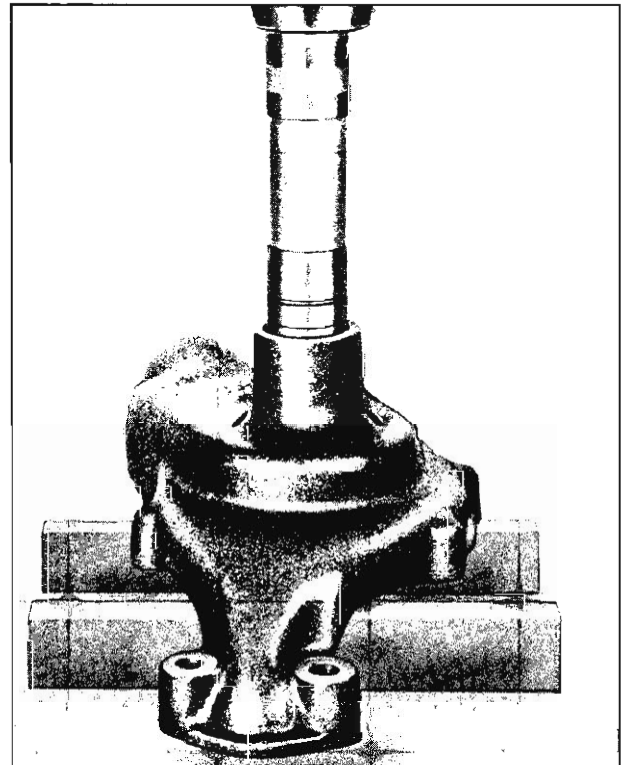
Installing Shaft and Bearing Assembly (235 and 283 Cu. In. Pump)
